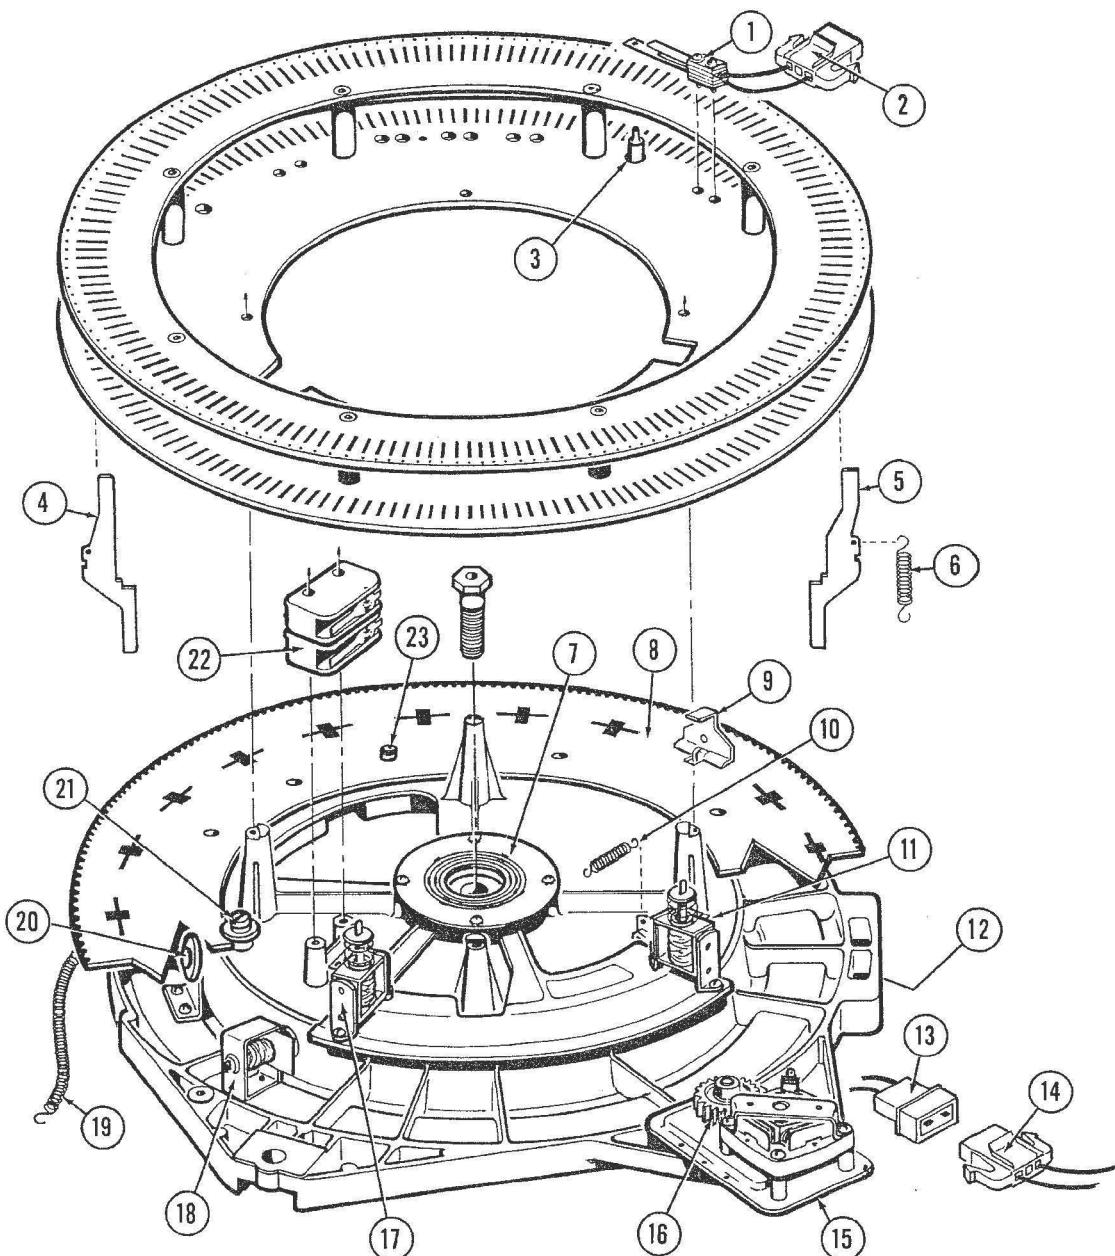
ELECTRIC SELECTOR 2400-2400S 115848
